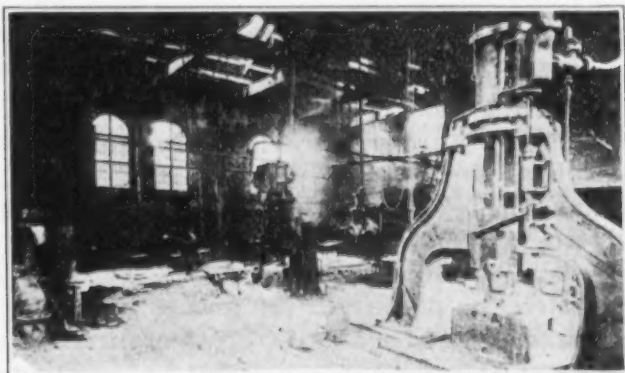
Small Hammer for Crucible Steel Forging and Tilting.
